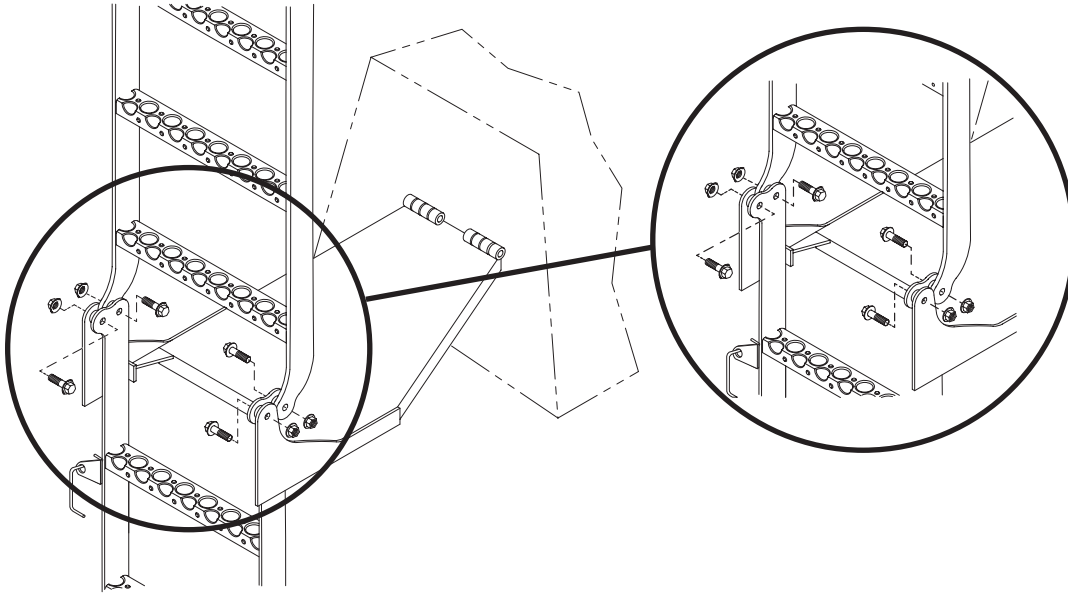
Remove and discard the (4) bolts and (4) nuts from the ladder side of the platform.
